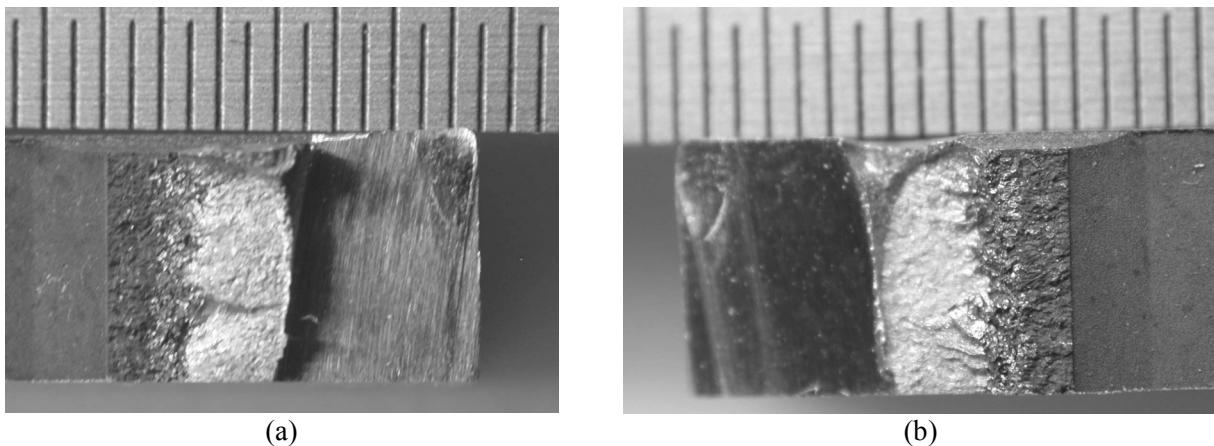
Photomicrographs of the fracture surfaces of the two halves of Specimen 85–3A-TT.
